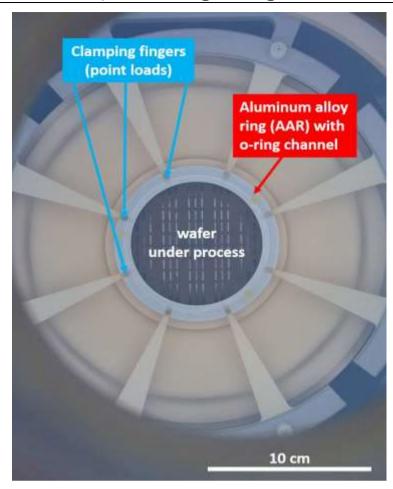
Aluminium alloy ring (AAR) with an o-ring channel. The o-ring channel (not visible in this view) is between the top surface of the wafer and back side of the AAR. O-ring channel is well aligned with the bottom o-ring (HCG gasket) shown in Figure. Well alignment between the o-ring channel and the bottom o-ring is important to minimize bending moment formation on the silicon wafer.
